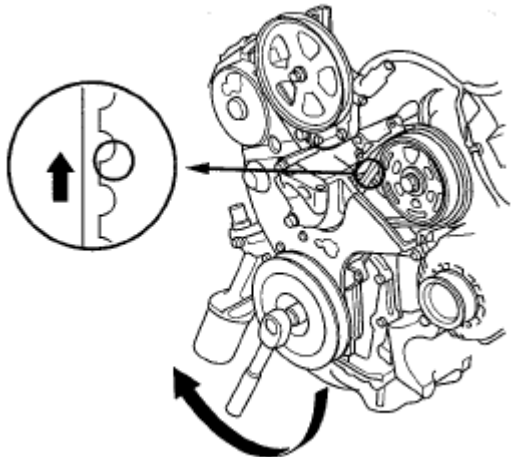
Identifying Timing Belt For Cracks And Oil Or Coolant Contamination
